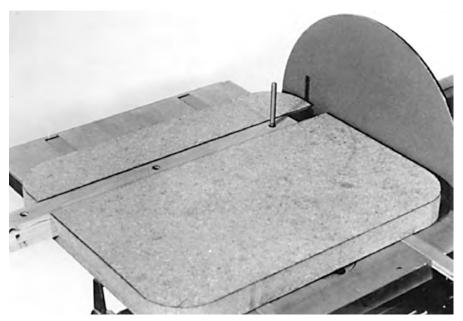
A special pivot fixture that you can make to sand perfect circles.
